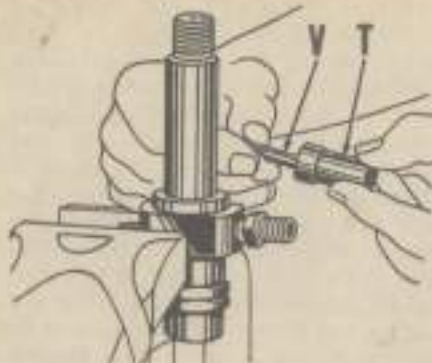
Removing injection nozzle valve (V) from tip (T). If the valve is difficult to remove, soak the assembly in a suitable carbon solvent.
